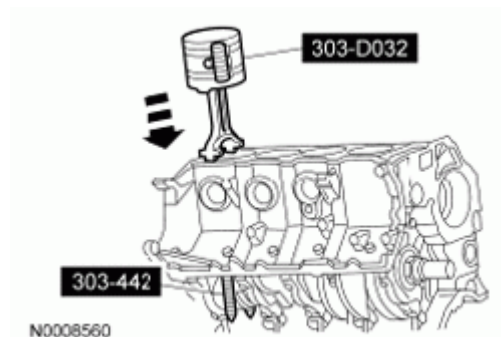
Installing Connecting Rod With Upper Connecting Rod Bearing
